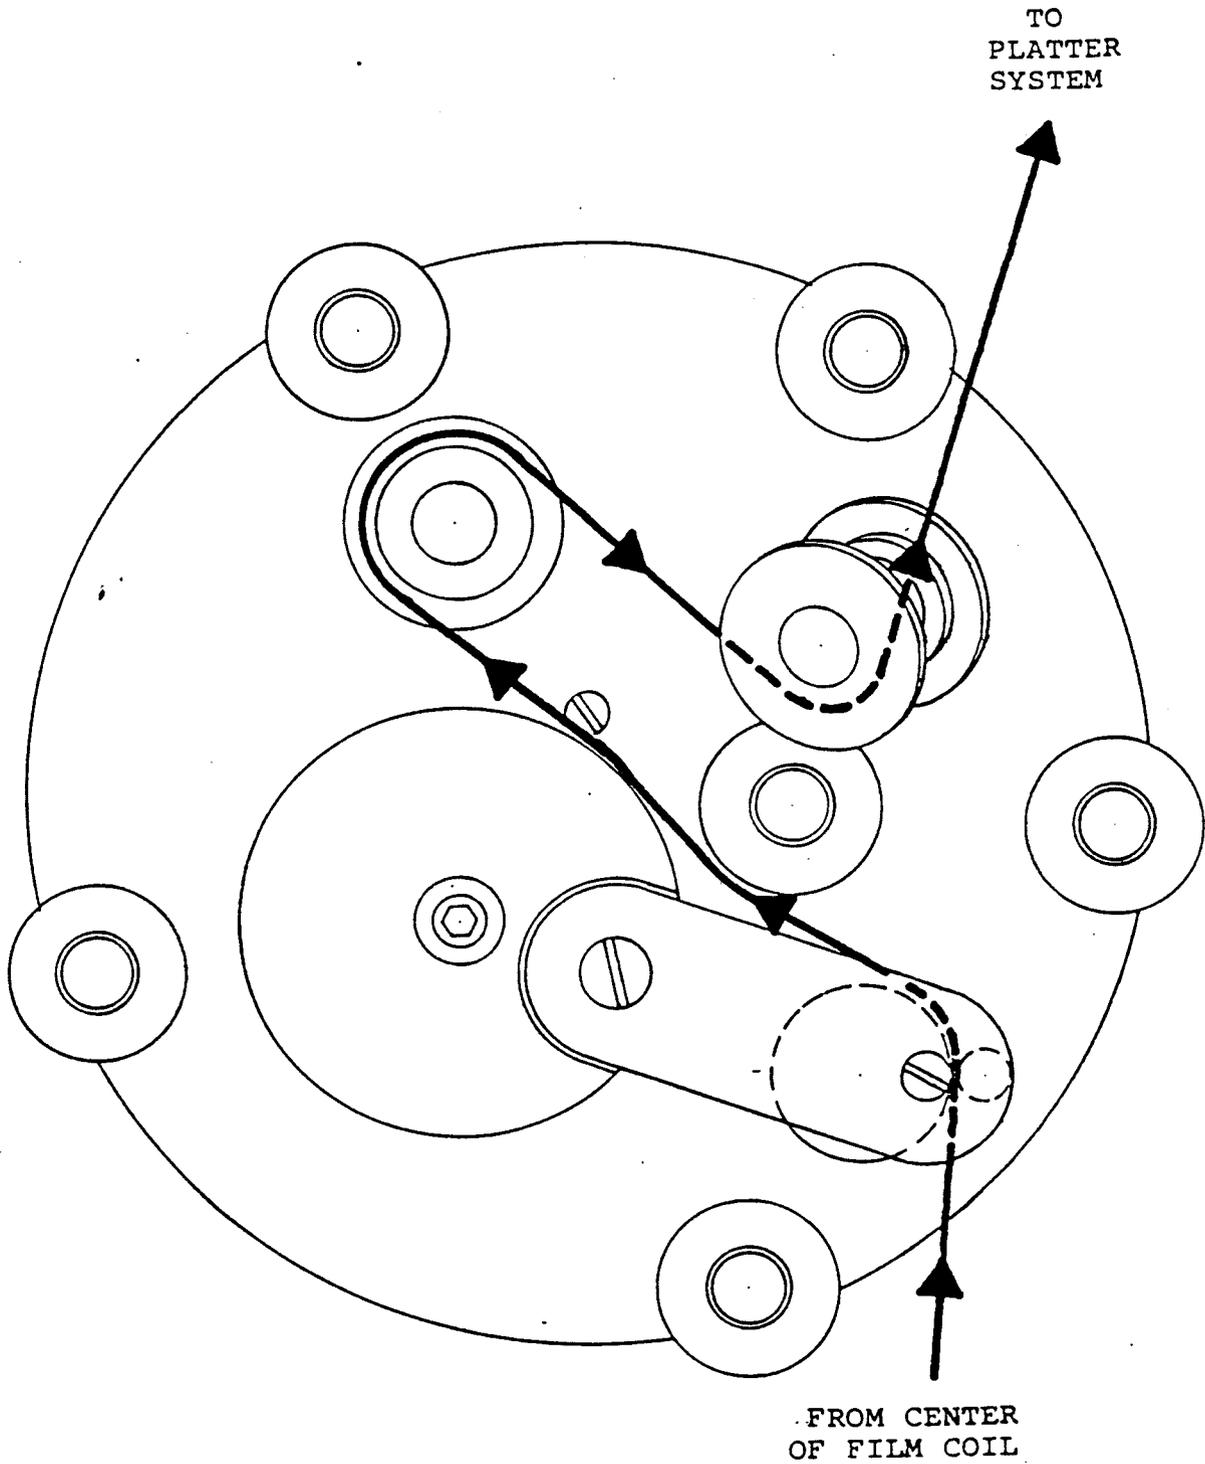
THREADING DIAGRAM - CONTROL CENTERPIECE
